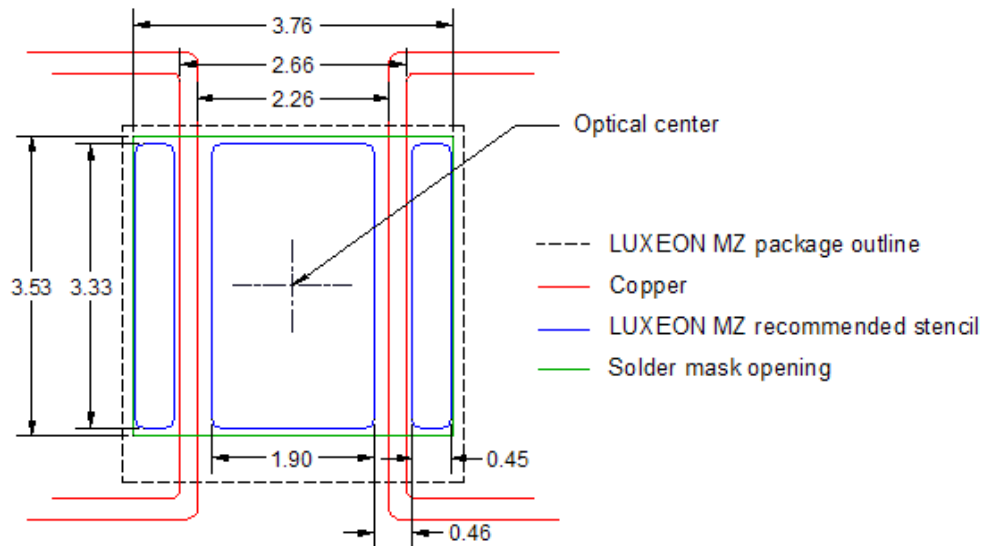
Recommended LUXEON MZ footprint design. All dimensions in mm.
